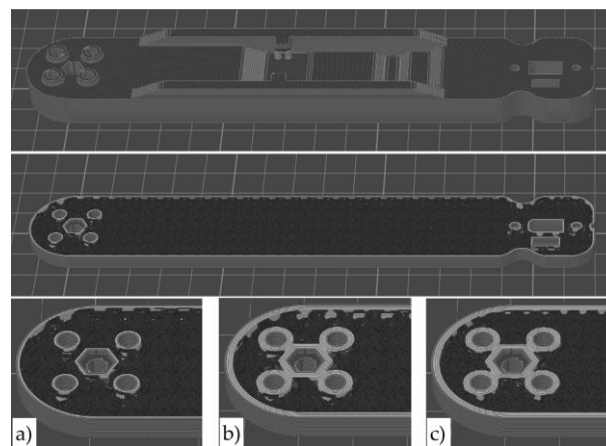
3D model of rotor arm with sliced views showing gyroid infill and wall structure: (a) 2 walls with 20 % infill, (b) 4 walls with 20 % infill, and (c) 4 walls with 30 % infill.
